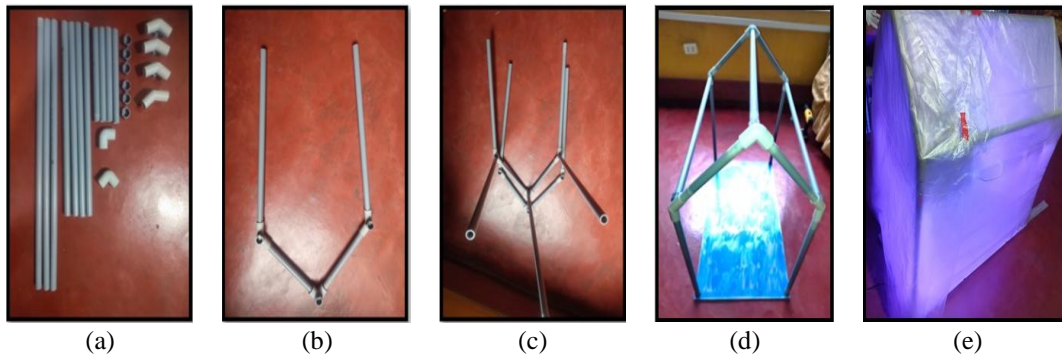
Greenhouse design; (a) cutting of pipes, (b) joining of elbows and plugs, (c) joining of structures, (d) joining of structure and base, and (e) lining of structure
